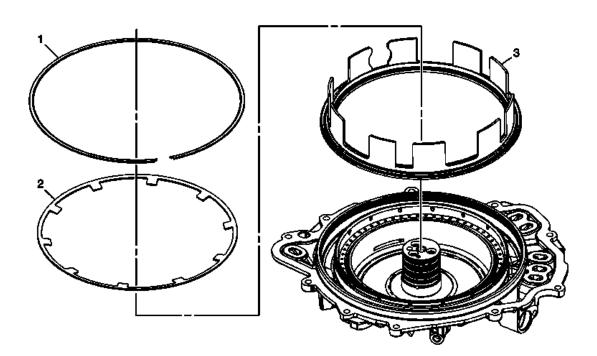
View Of 3-5 Reverse & 4-5-6 Clutch Fluid Seal Ring Courtesy of GENERAL MOTORS COMPANY
